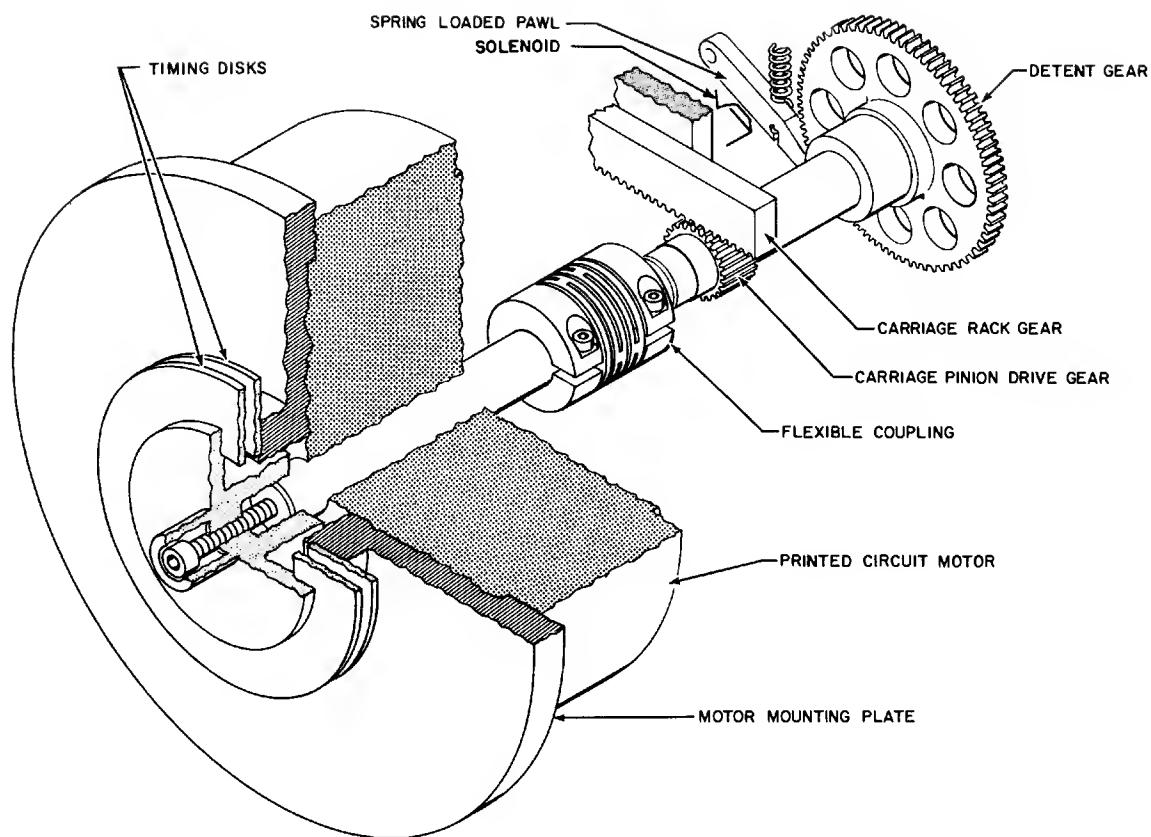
Carriage Drive and Positioning Mechanism
